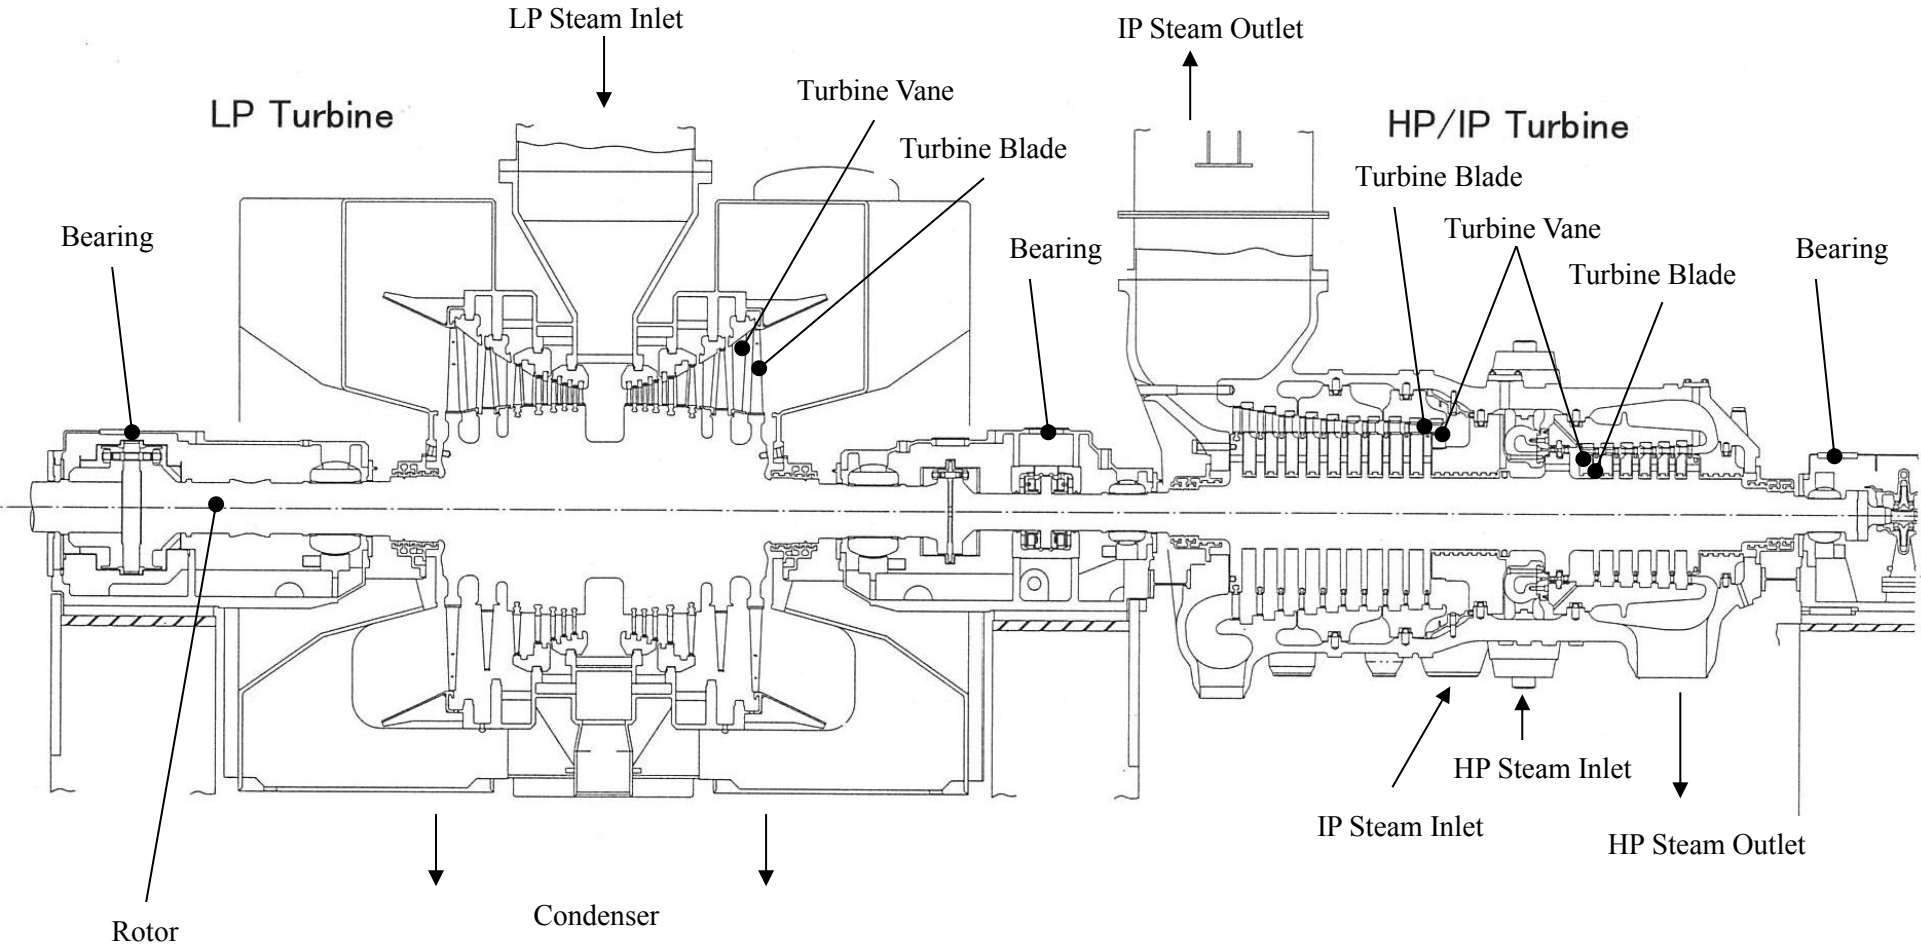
Longitudinal Cross Section of a Typical Steam Turbine
